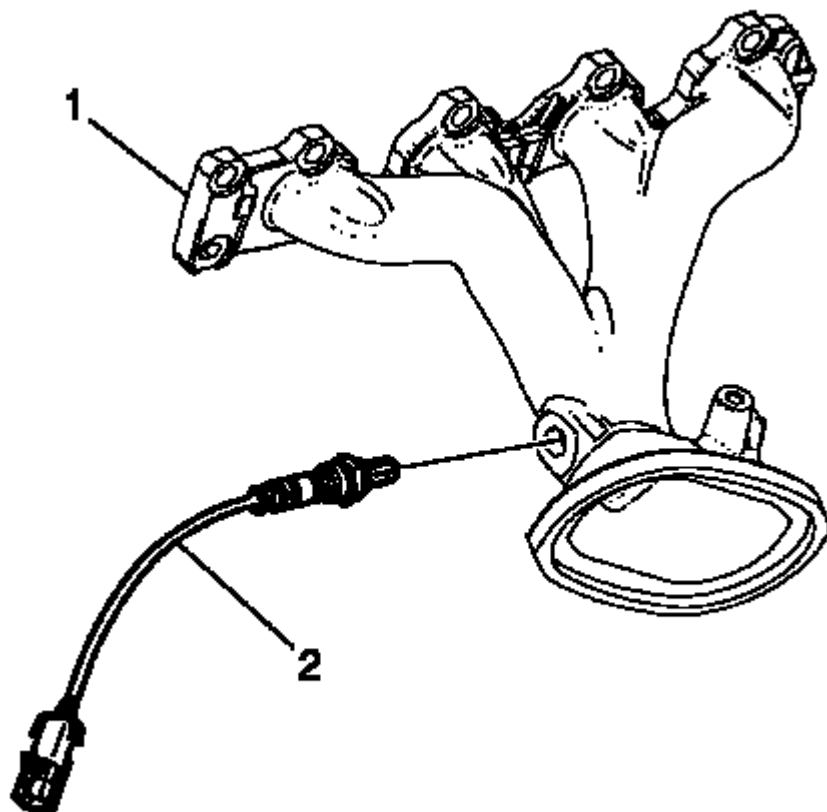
View of Exhaust Manifold and Oxygen Sensor
